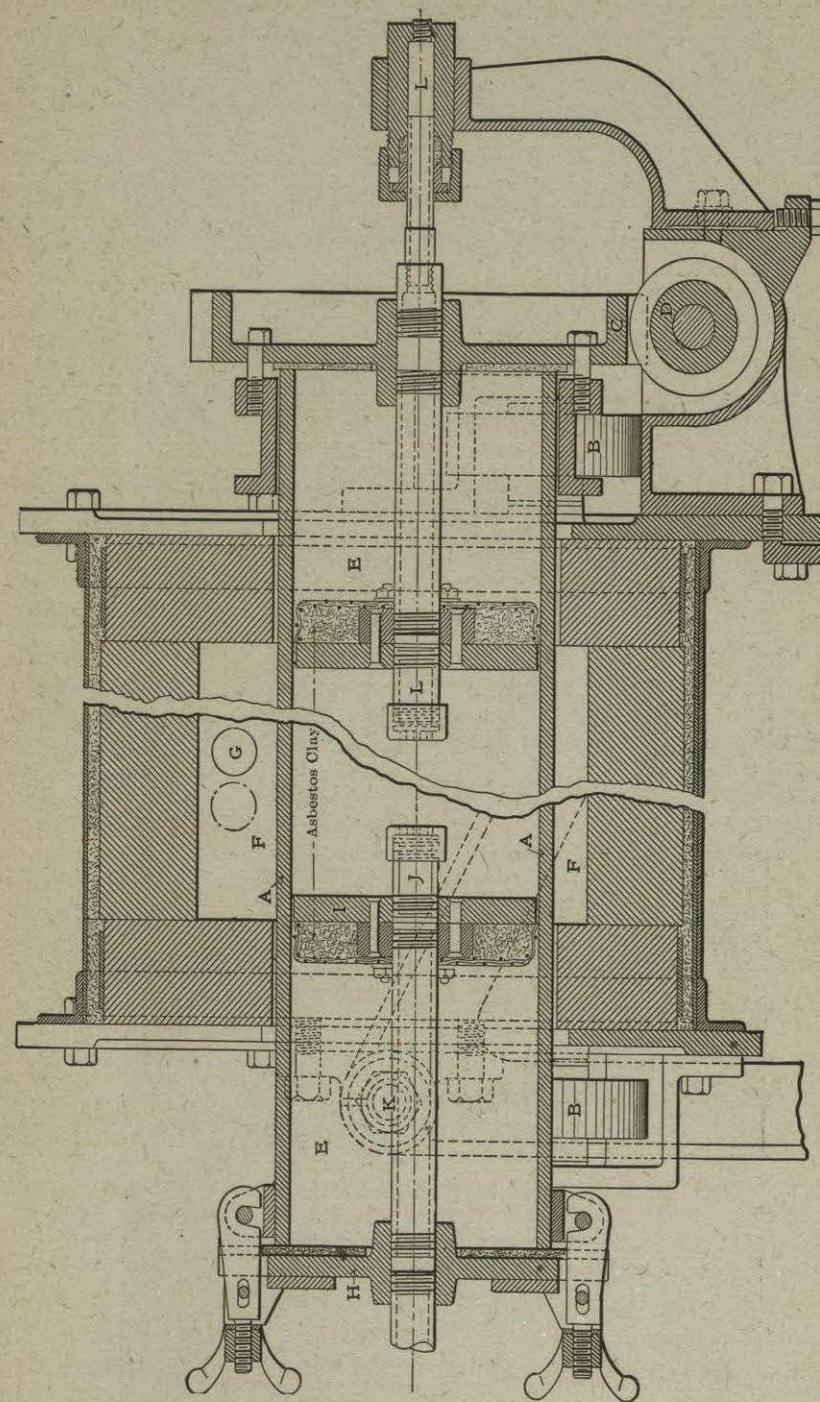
Sectional view of furnace for carbonizing with gas.
